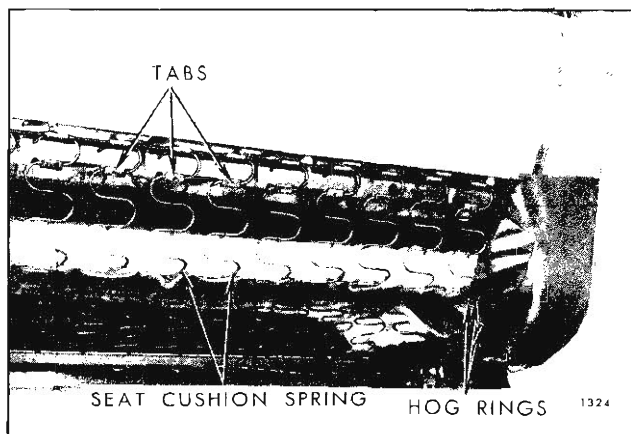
H2—Front Seat Cushion to Front Seat Back Spring Attachment
